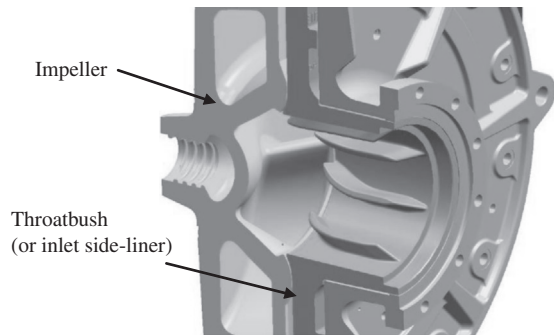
Sectional view showing relationship between impeller and throatbush.
